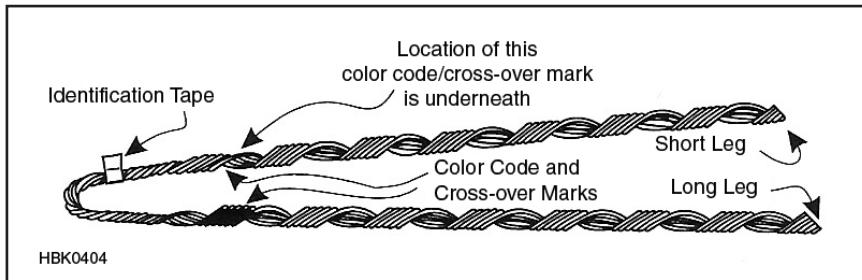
Preformed guy wire “dead end” grip. The grip is wound around the guy wire and holds the load through friction.
